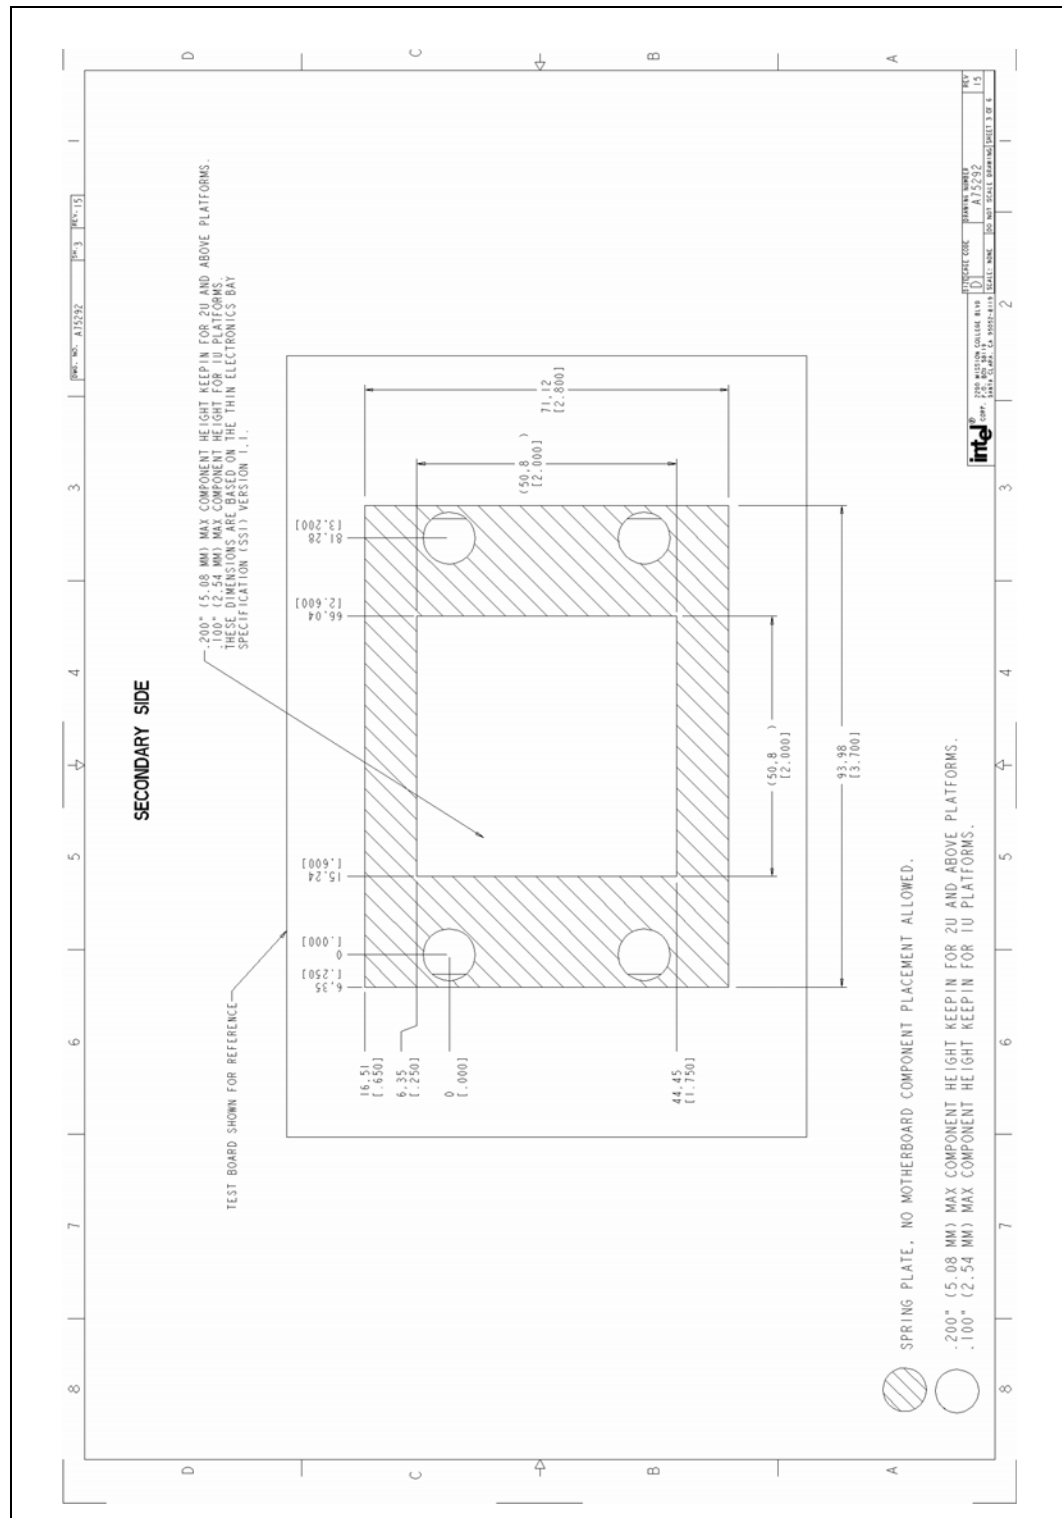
Board Mounting-Hole Keep-Out Zones
